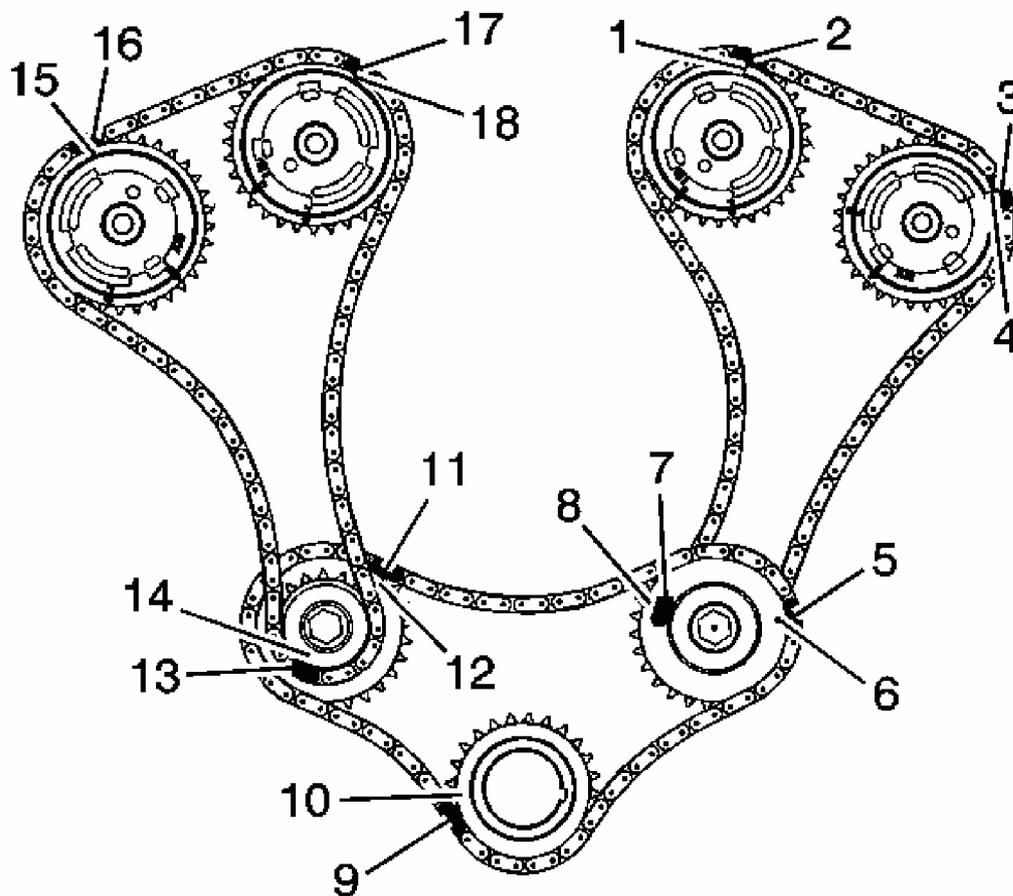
Identifying Timing Chain Marks And Their Respective Locations On Gears, Sprockets And Actuators
